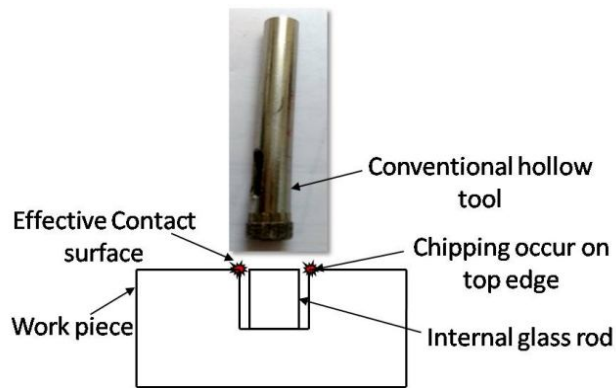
Criteria of drilling by the hollow abrasive tool
